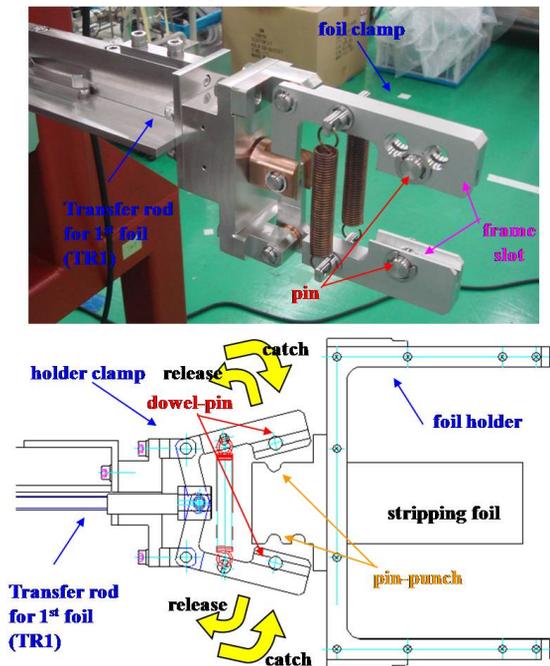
Photograph and schematic diagram of the holder clamp mechanism.
